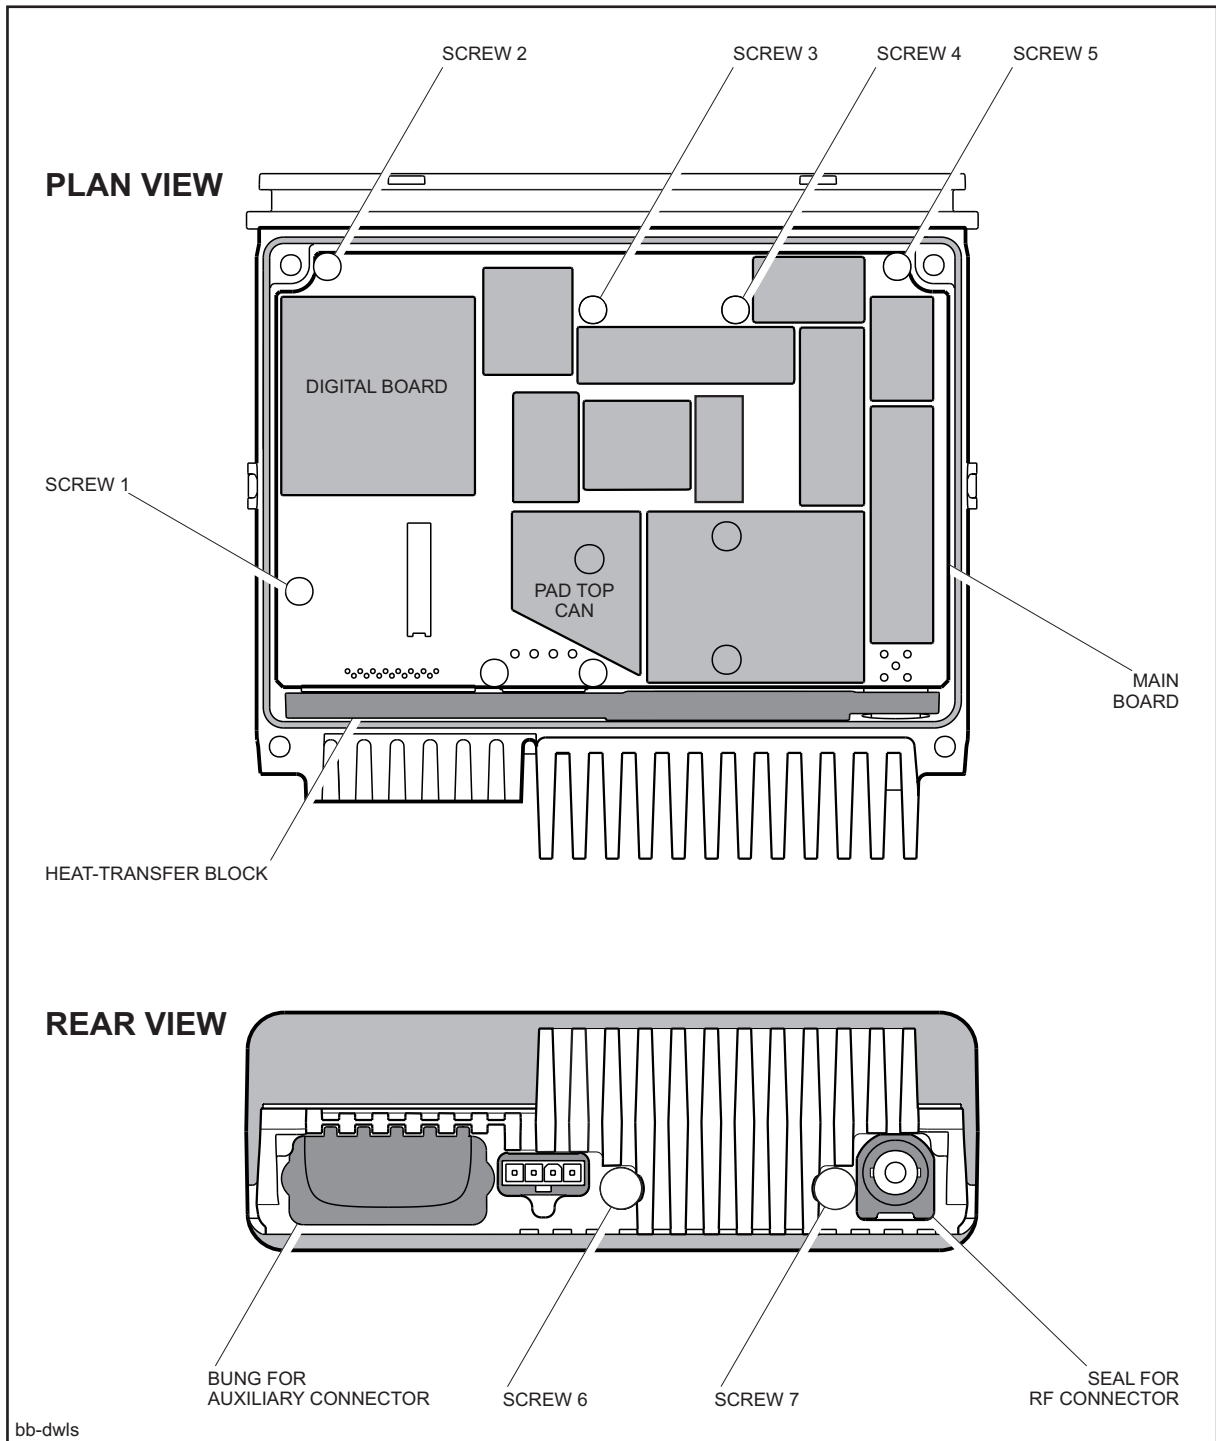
Illustration of the chassis showing the screws that secure the main-board assembly
